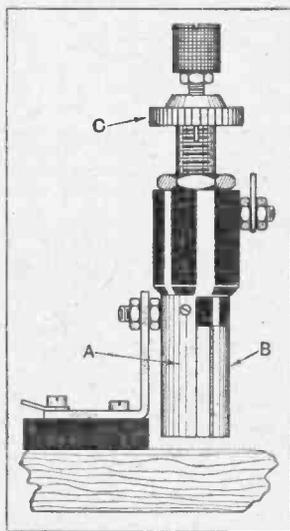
Showing details of reaction condenser mounting. A = fixed plate, B = moving plate, C = clamp.
